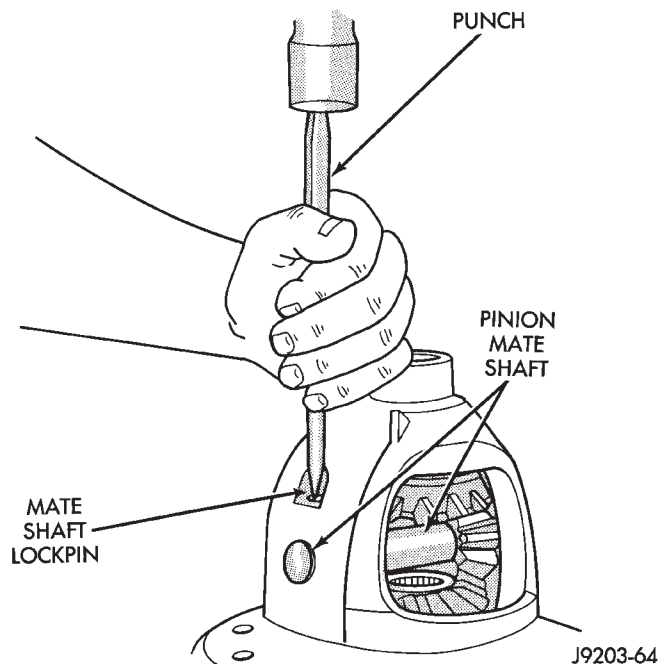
Pinion Mate Shaft Roll-Pin Installation
